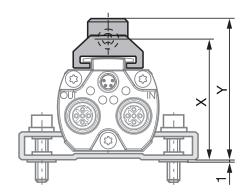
Dimensions and distances with BTL5-F-2814-1S magnet
